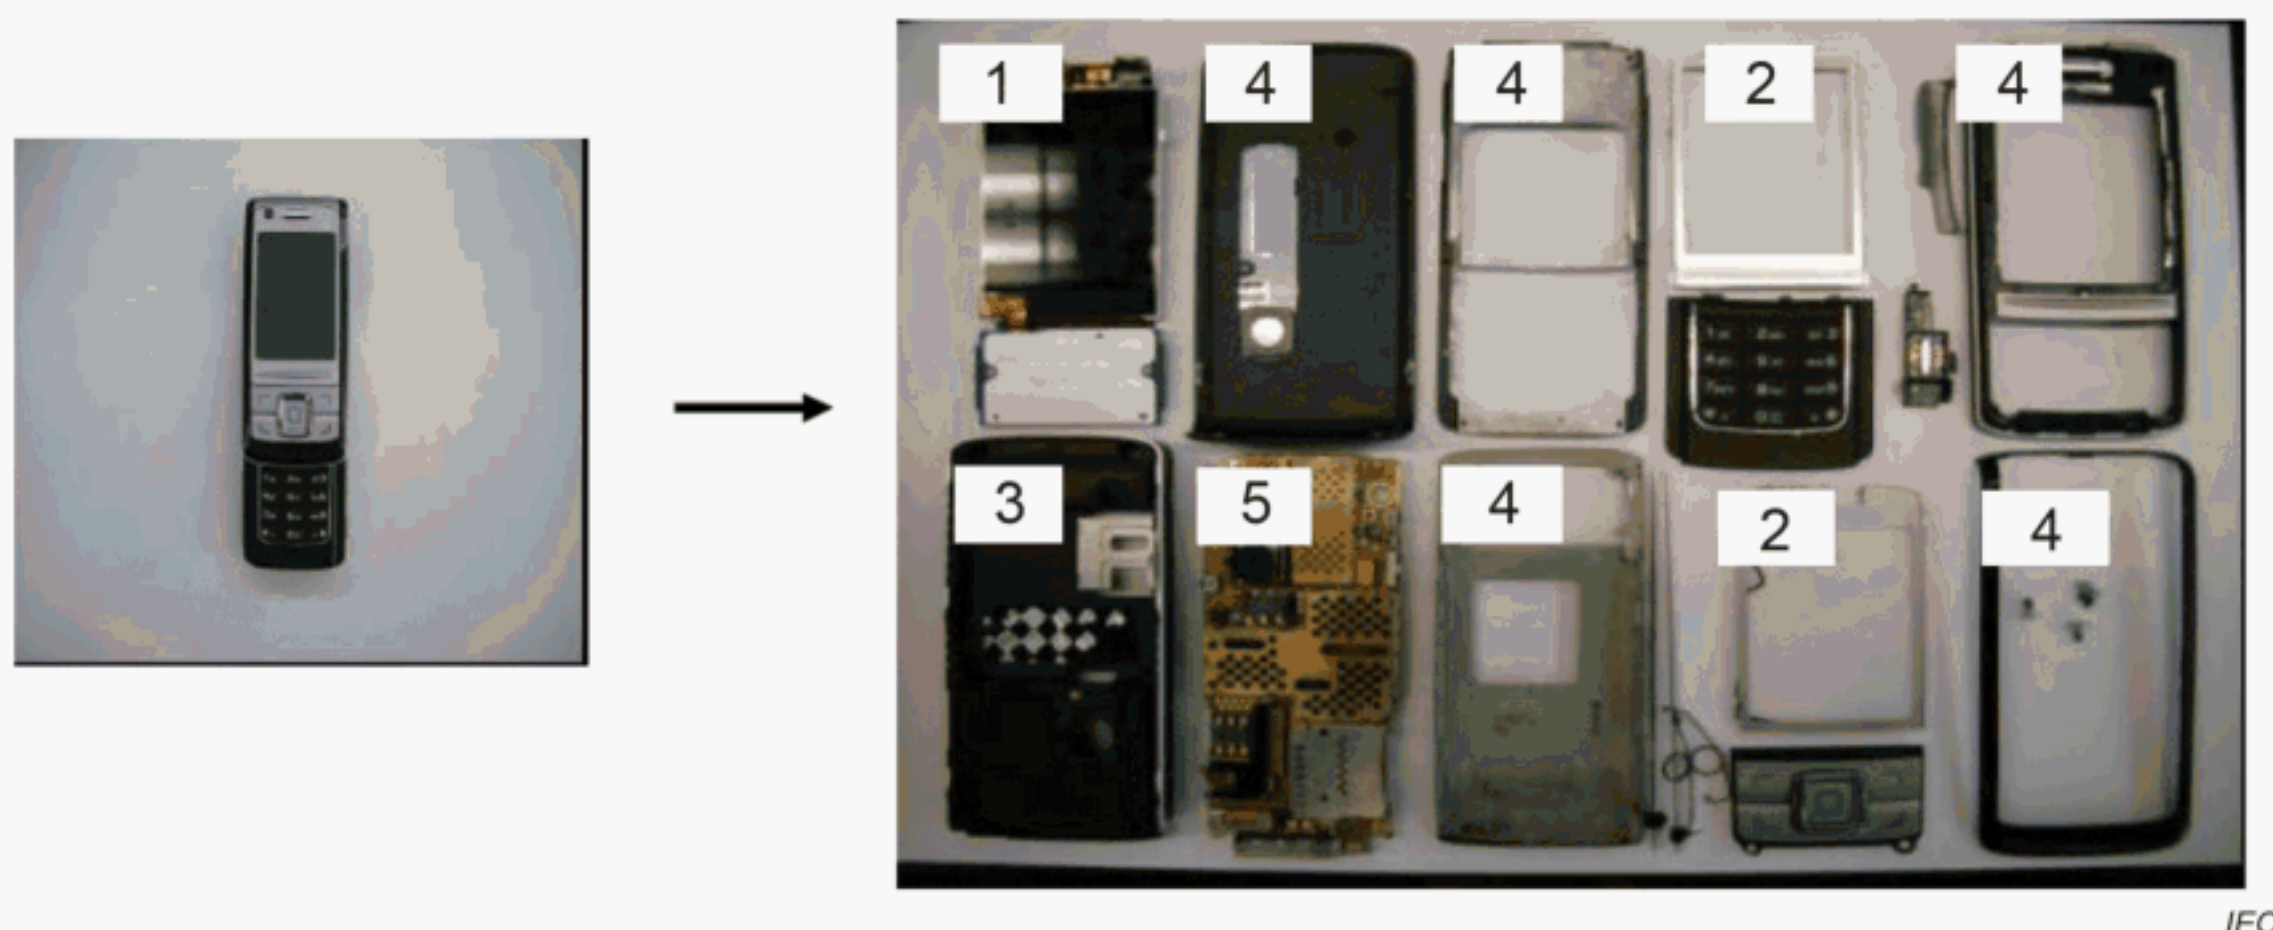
Partial disassembly of a mobile phone (type B) into its major parts
